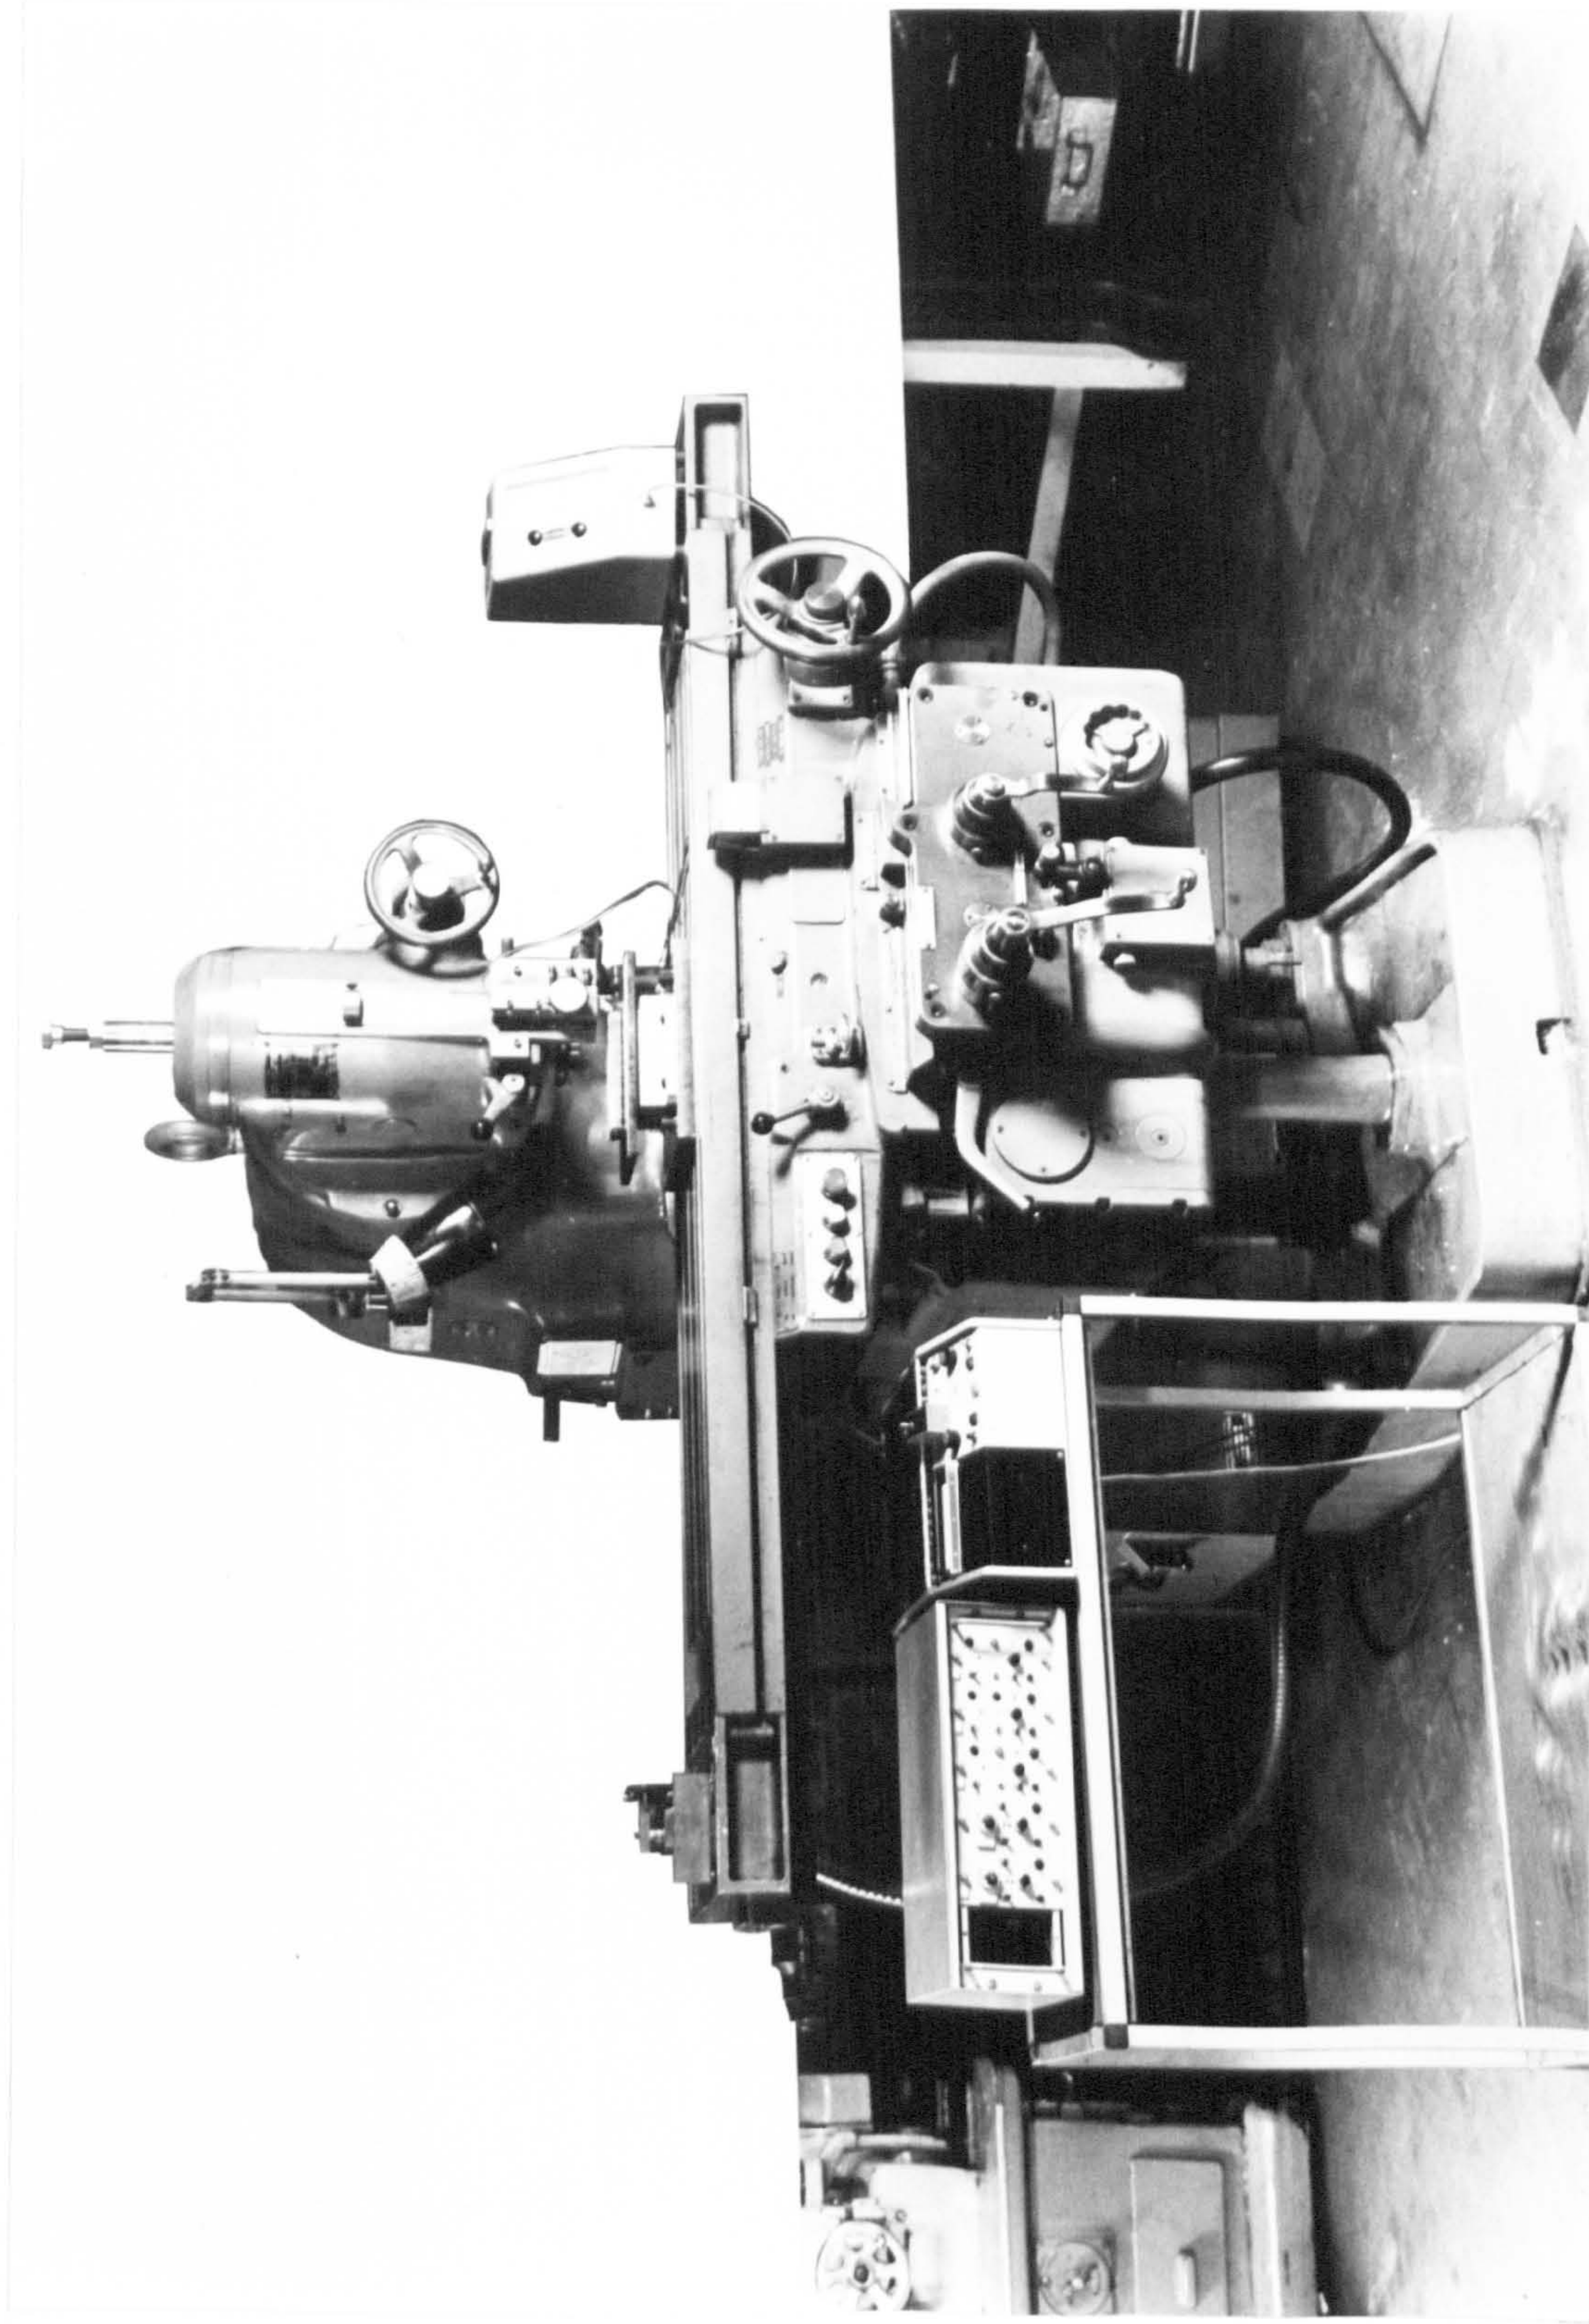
MACHINE TOOL AND ASSOCIATED EQUIPMENT USED FOR SIMULATION TESTS
